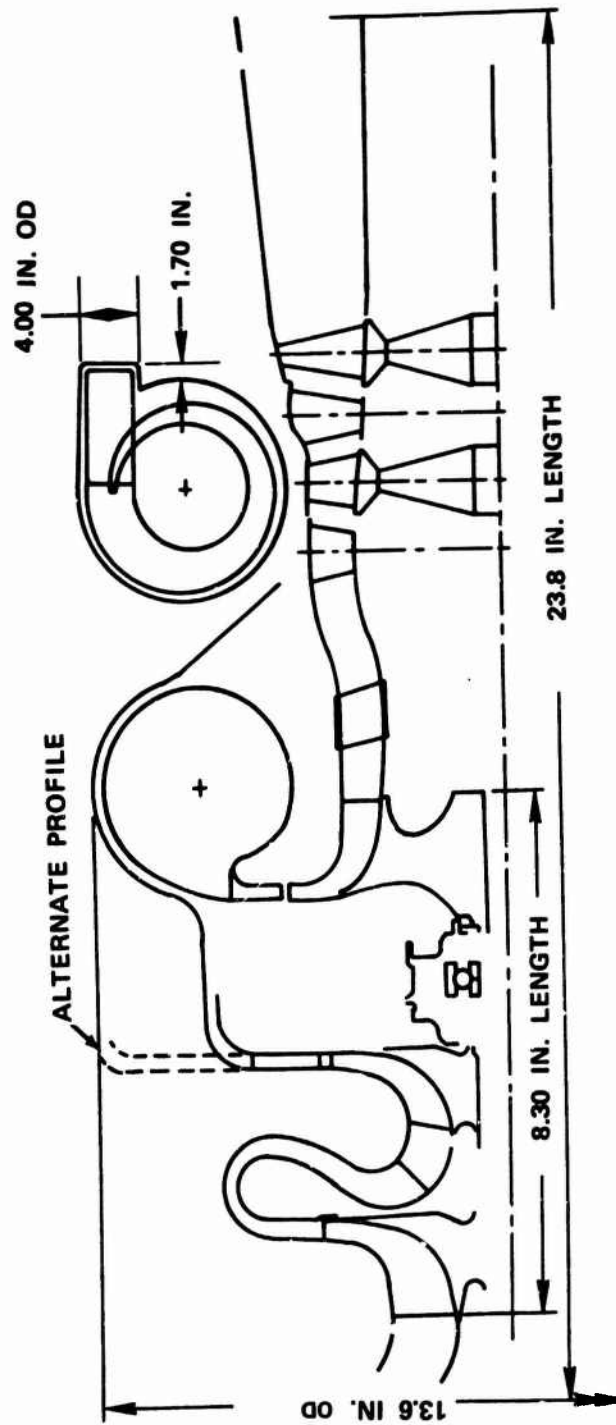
Turboshaft Engine Schematic With Two-Stage Centrifugal Compressor, Can Combustor, and Radial Turbine.
